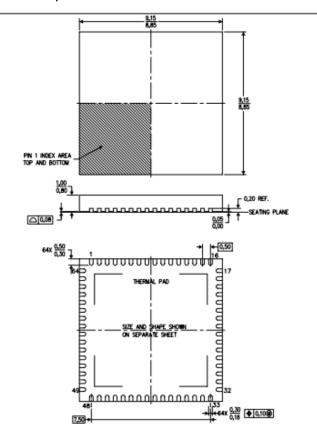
CC3100 Dimensions and Layout; A figure describing the size, dimensions, and layout of the CC3100; reprinted with permission from Texas Instruments, Inc.
